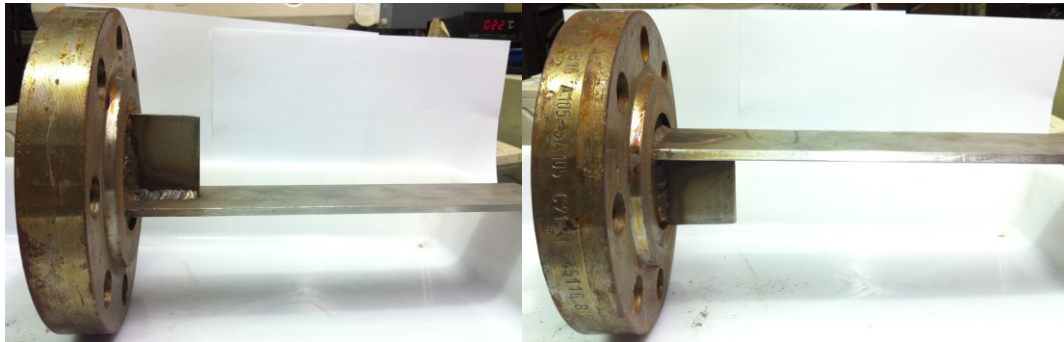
The inlet blanking flange with welded low-plate and high plate configuration.
